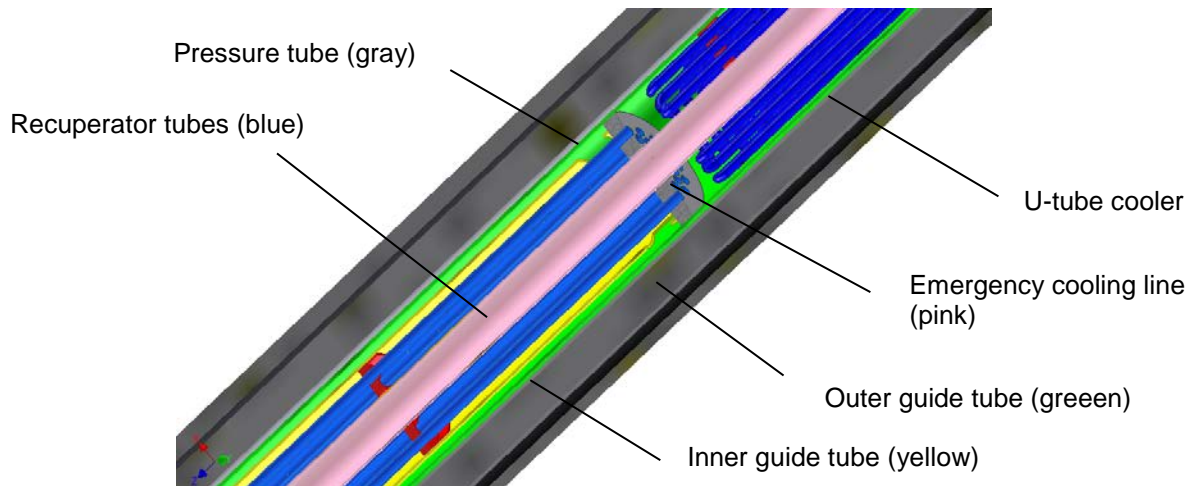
Design details of the recuperator and the U-tube cooler inside the pressure tube.
